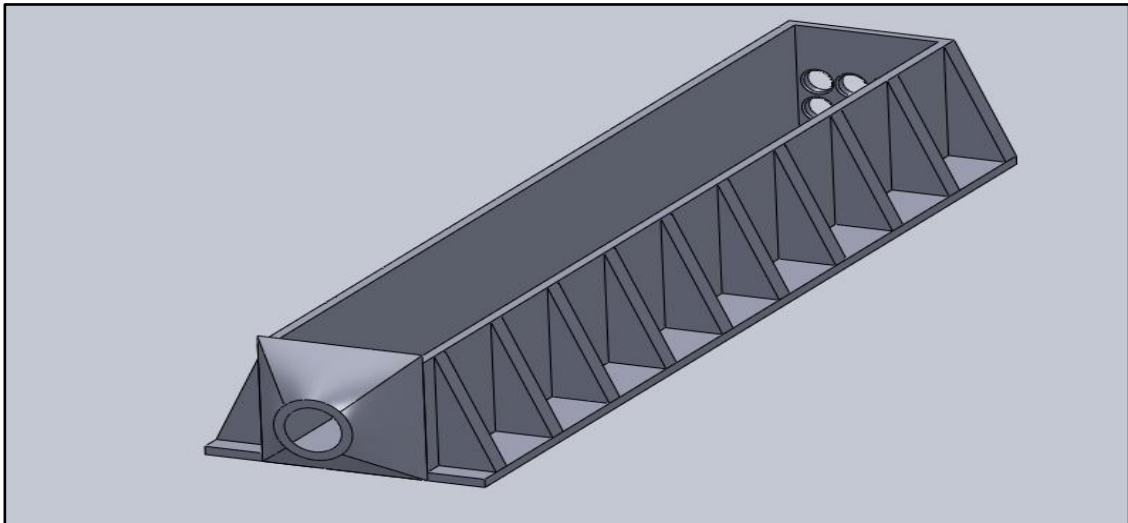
Single Tank Circular Diffuser Design 3D view
